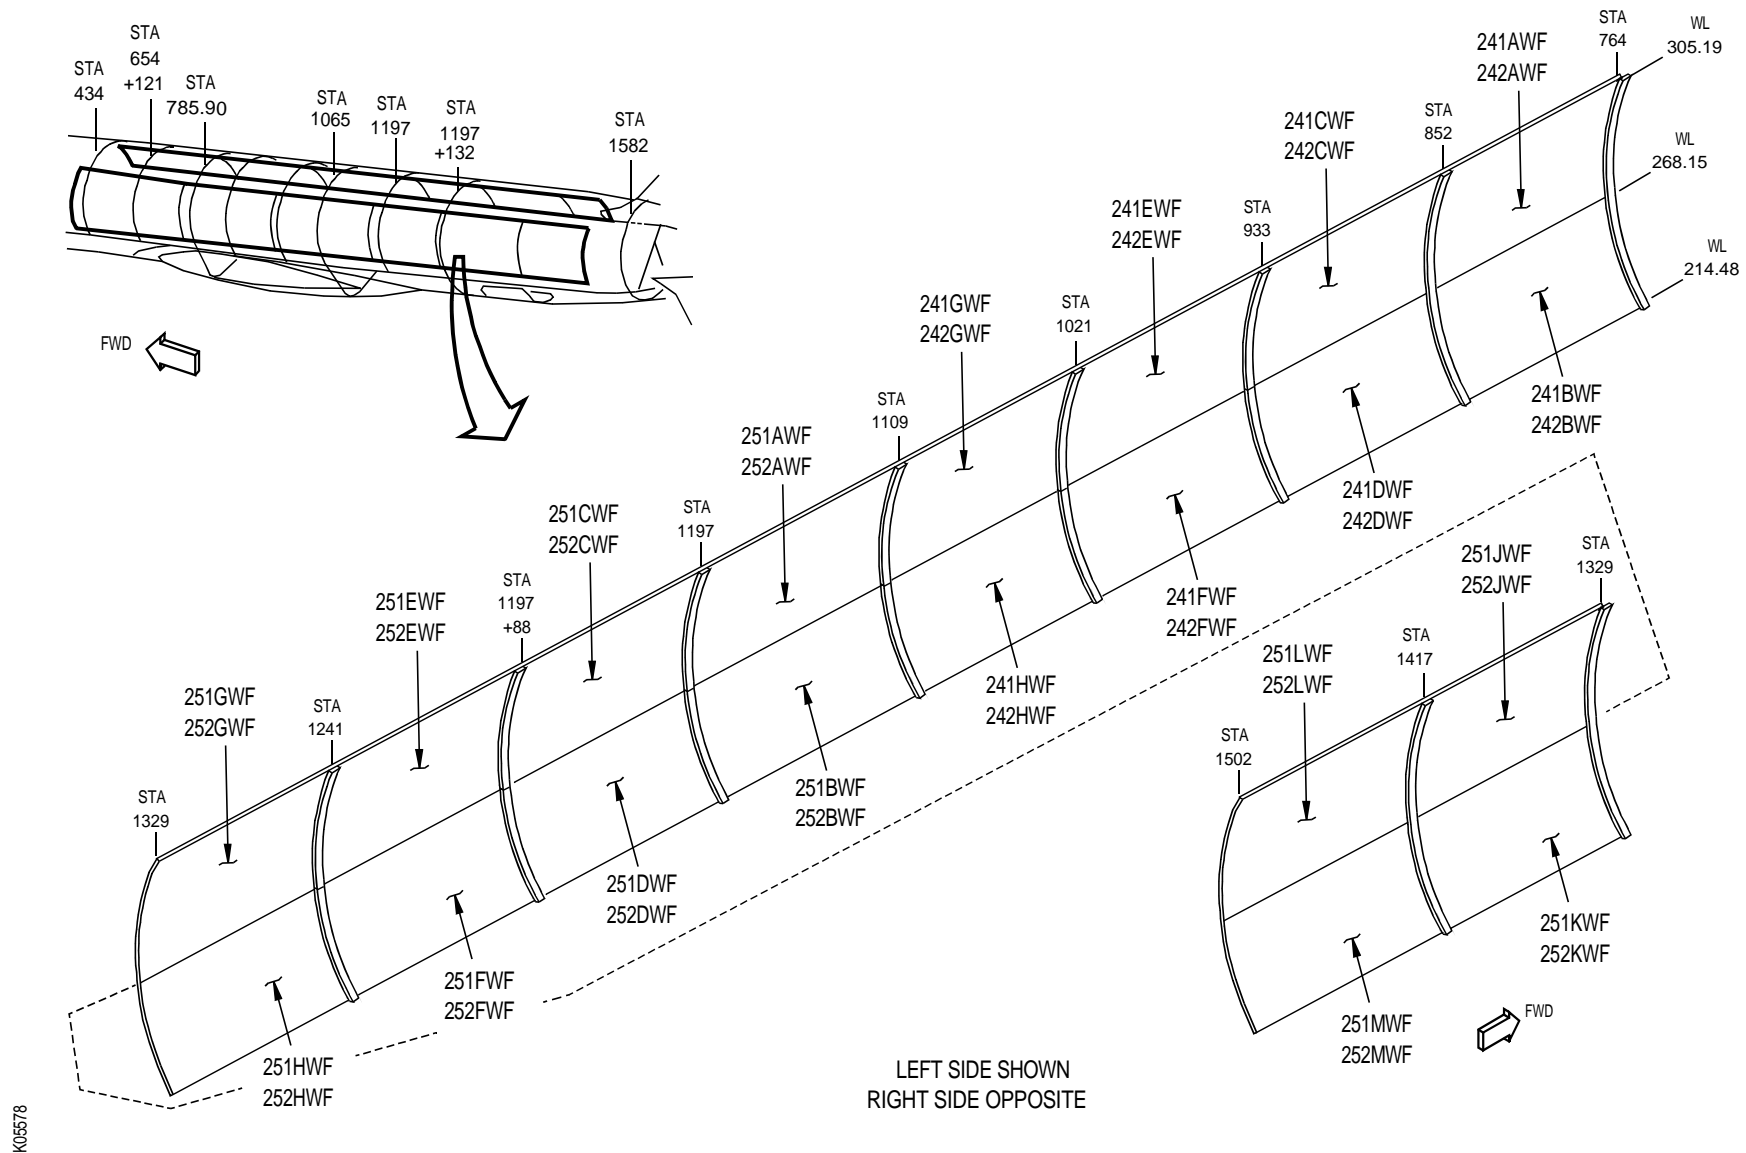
SUB-MAJOR ZONE 241/242/251/252 MAIN DECK SIDEWALL PANELS - FREIGHTER
